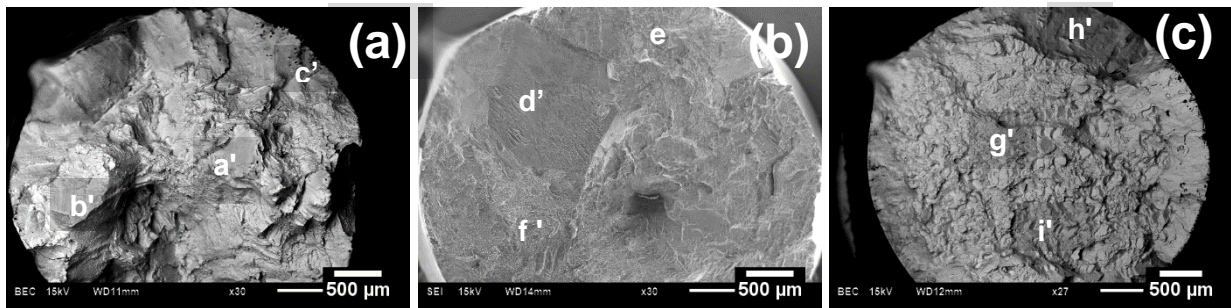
The fracture surfaces of (a) wrought, (b) IC, and (c) AM Ti6Al4V
